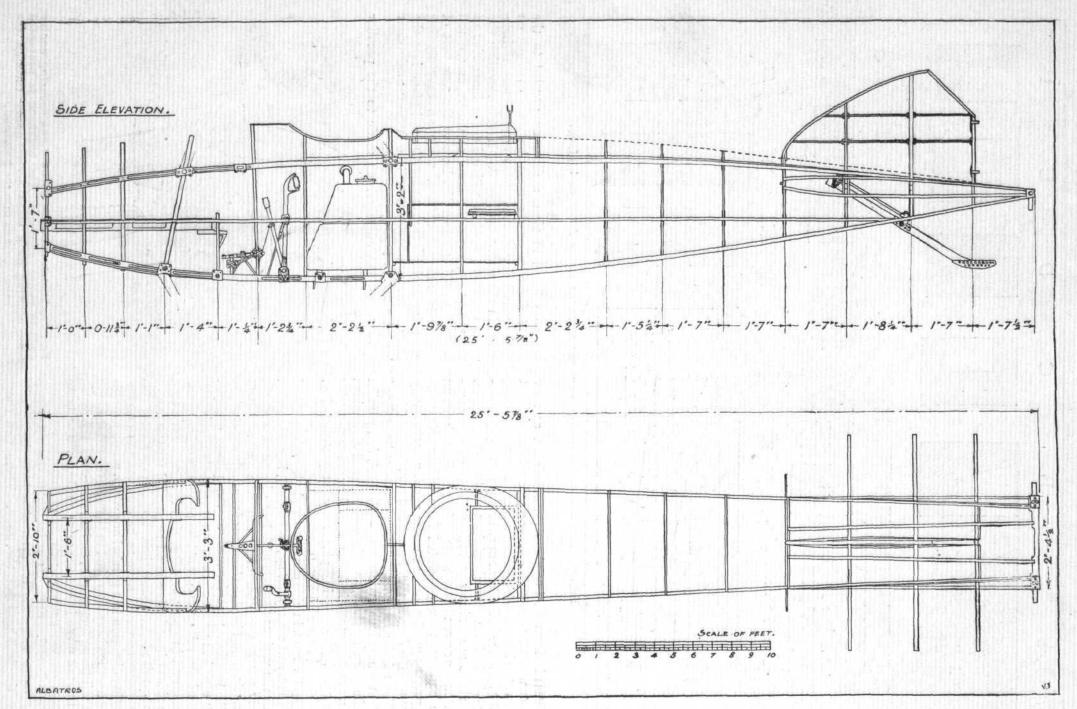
General arrangement of the Albatros body. Side elevation and plan to scale.
